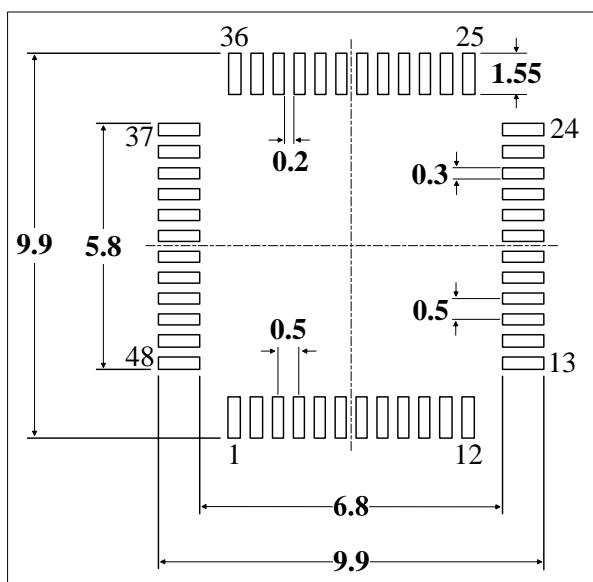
Suggestions for LQFP48 (7x7mm) package solder pads⁽¹⁾
